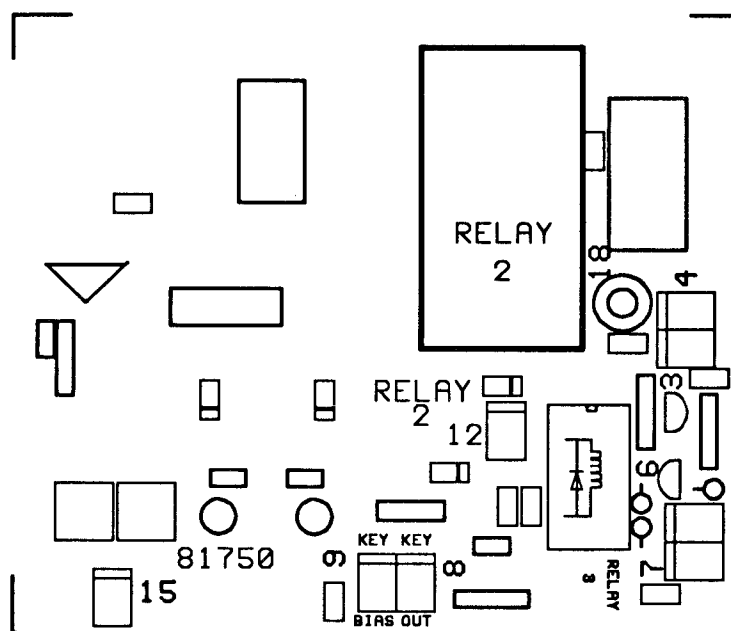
16 OUTPUT BOARD COMPONENT LAYOUT (81750)
